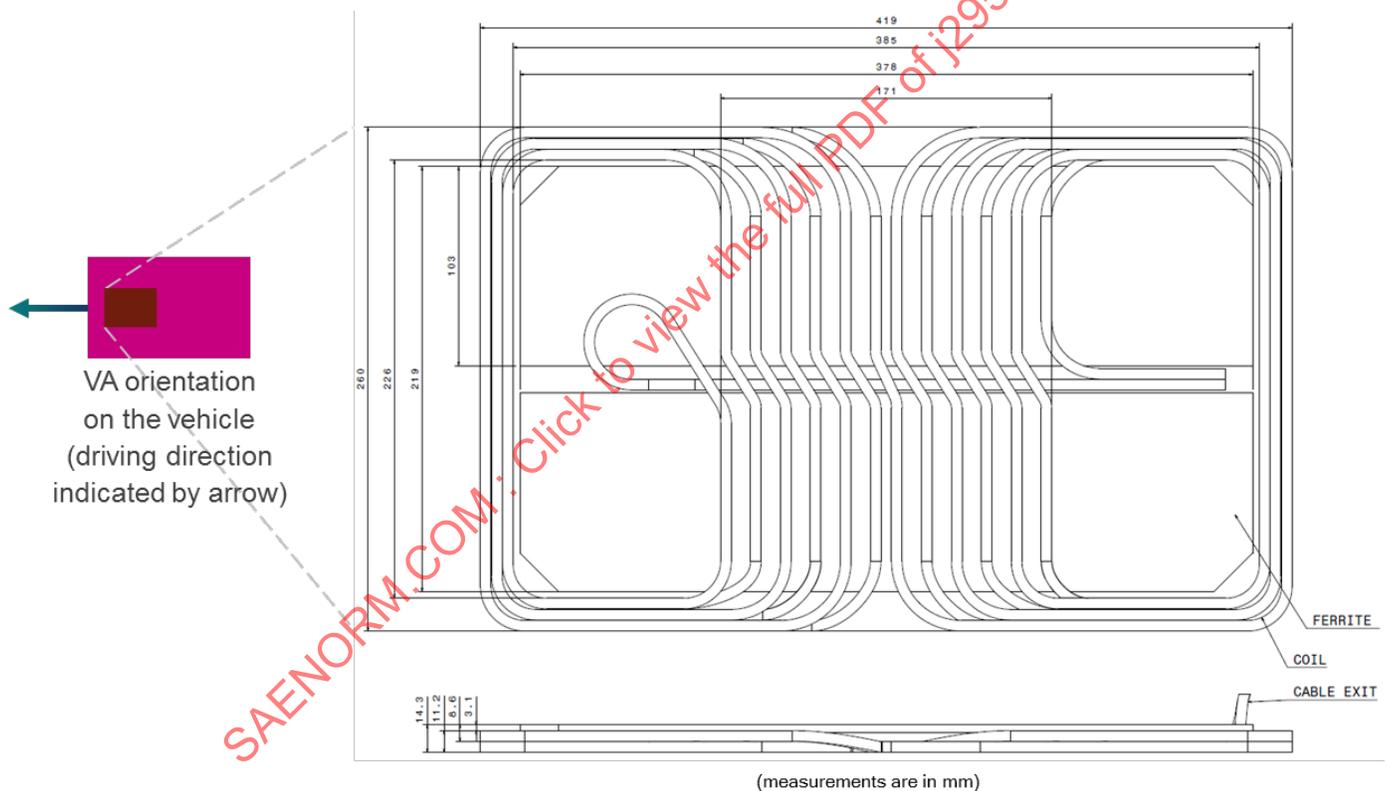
Mechanical dimensions of the Product VA WPT3/Z2
